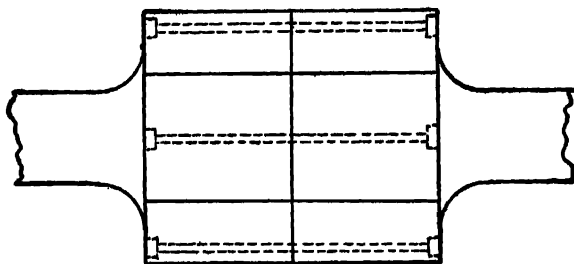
FIELD CONSTRUCTION WITH TWO HALVES HELD TOGETHER BY HEAVY BOLTS
